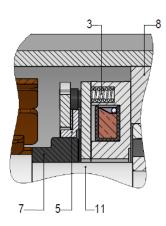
/1: Interference fit assembly of hub (7) and motor shaft (11)
